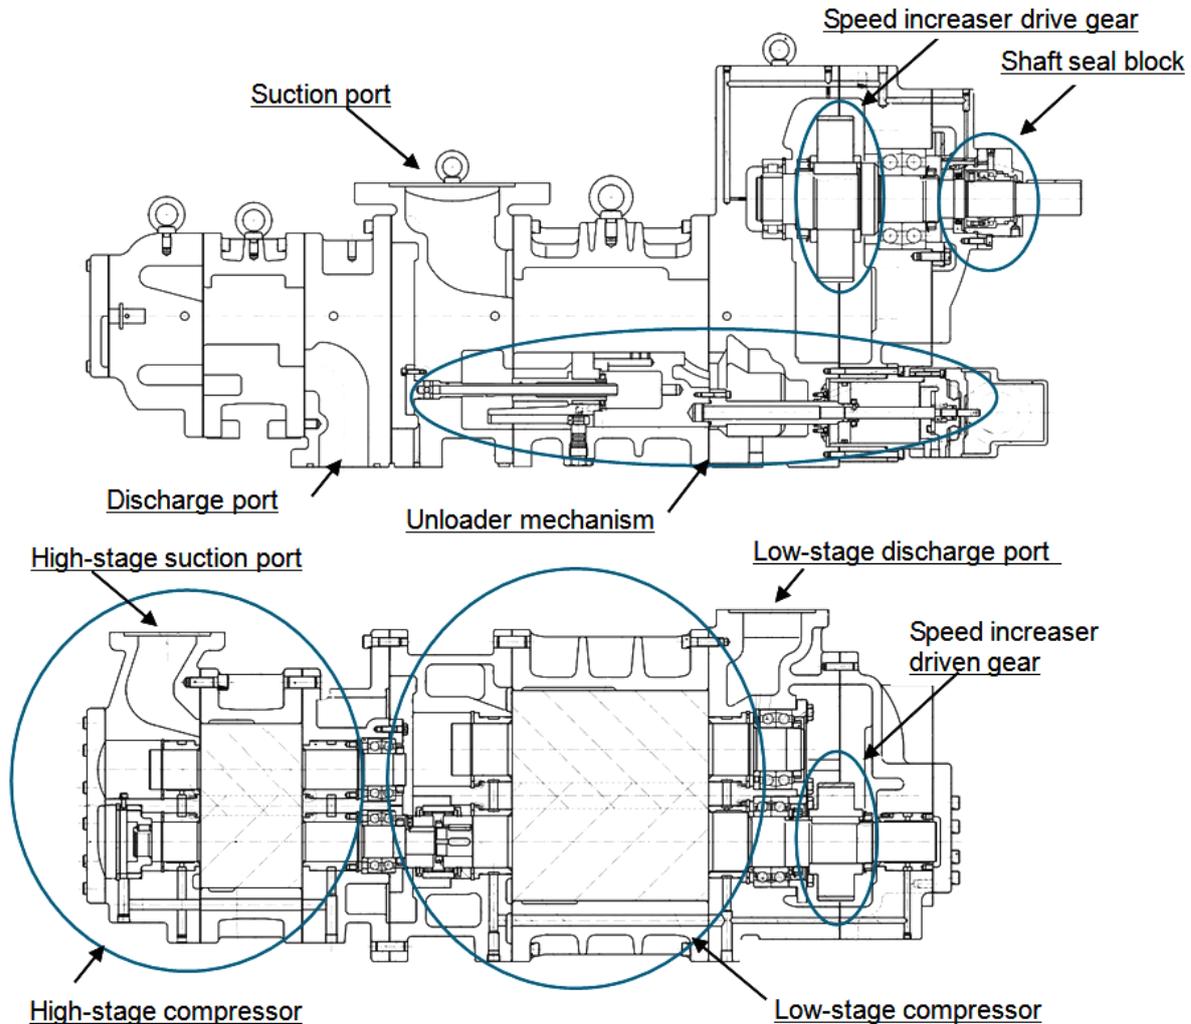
1612LSC Speed Inserter Type Sectional View
